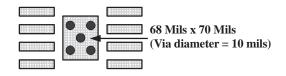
DGN PowerPAD PCB Etch and Via Pattern
